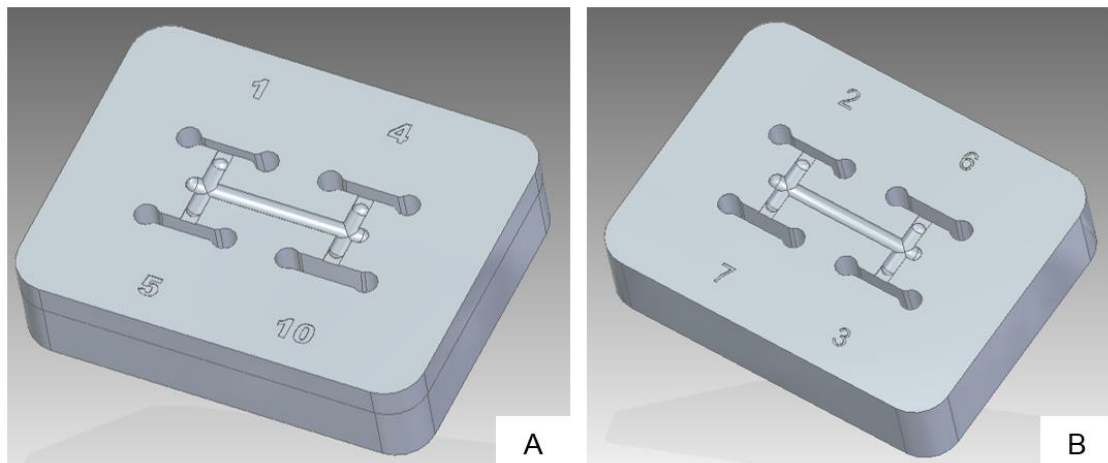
Alumide® inserts with four draft angle parts in each insert.
